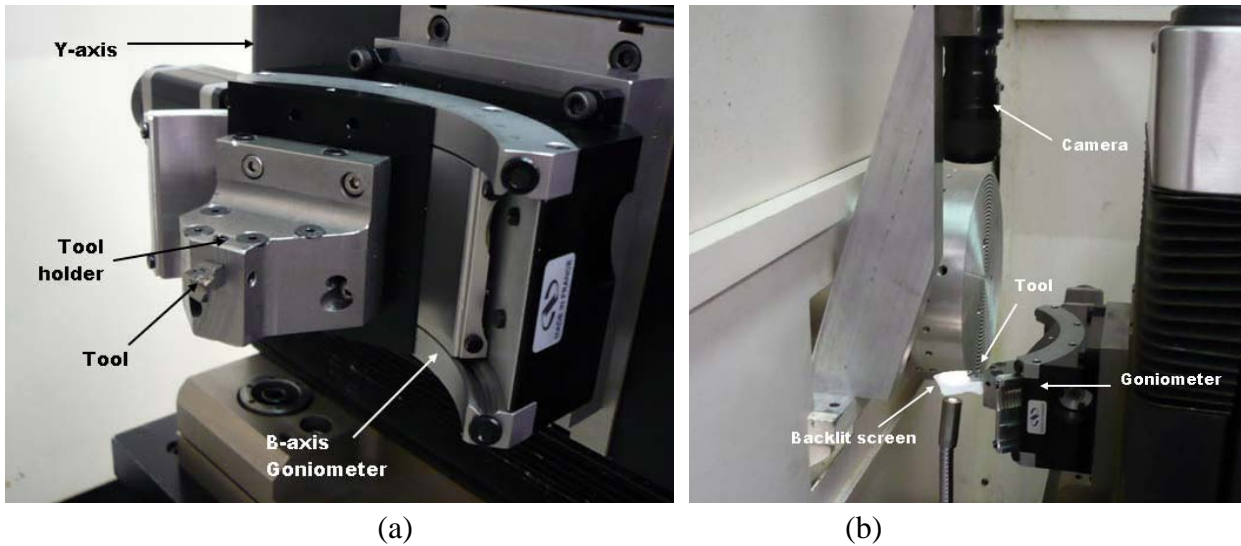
Newport Goniometer mounted on y-axis of diamond turning machine with a) showing a closeup of the axis and b) showing the placement on the DTM with camera looking down.
